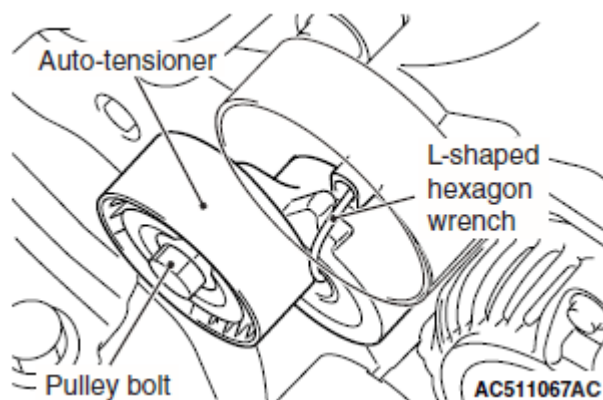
Identifying Auto-Tensioner, Pulley Bolt And L-Shaped Hexagon Wrench
